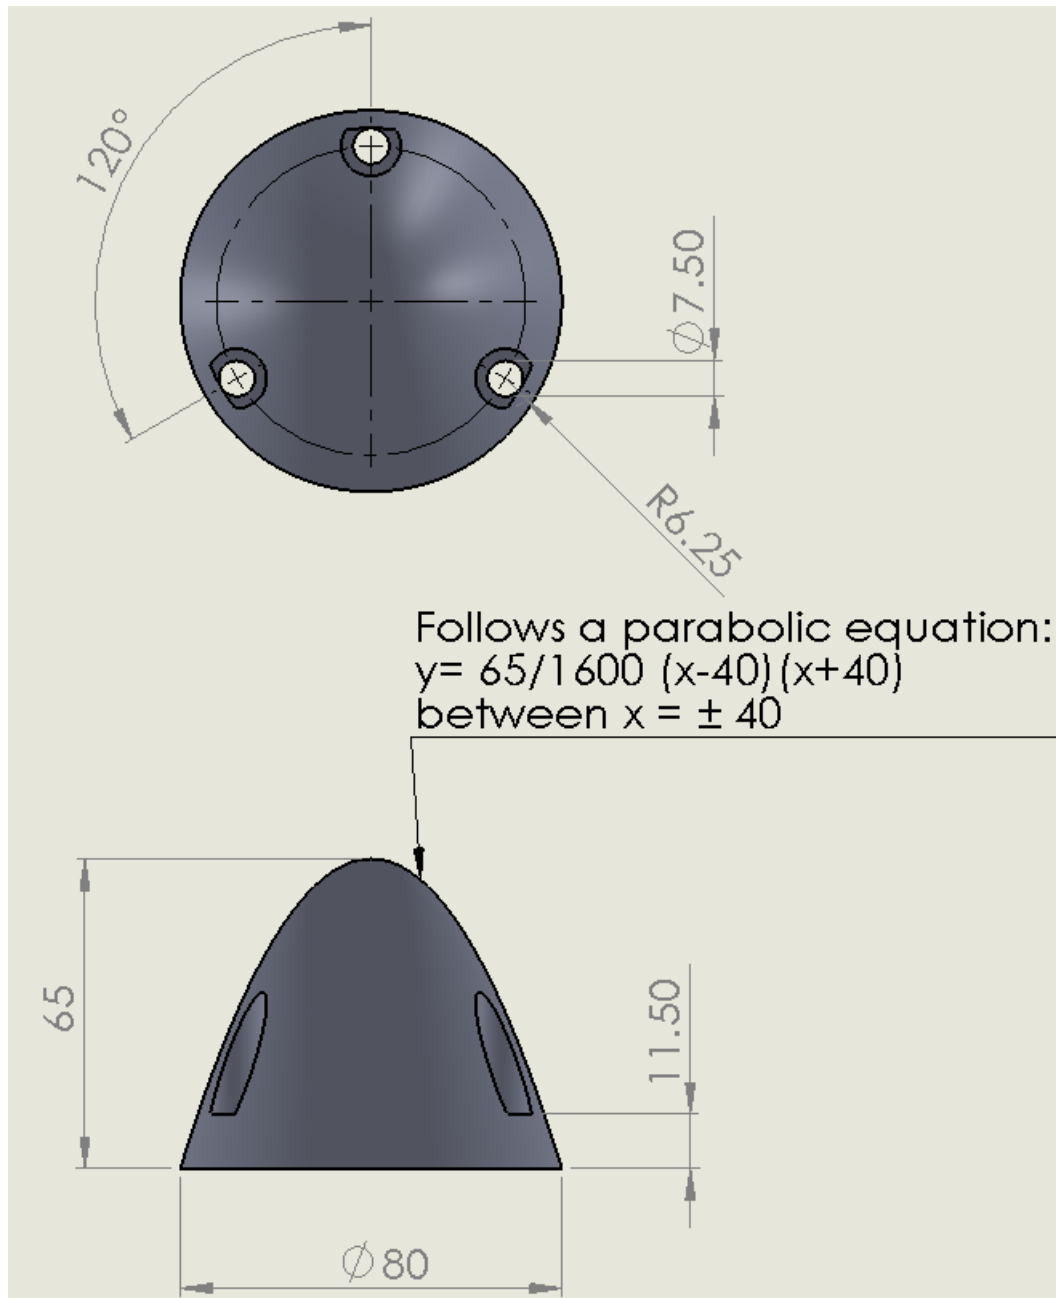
Dimensioned drawing of the bottom parabolic radiation shield.
